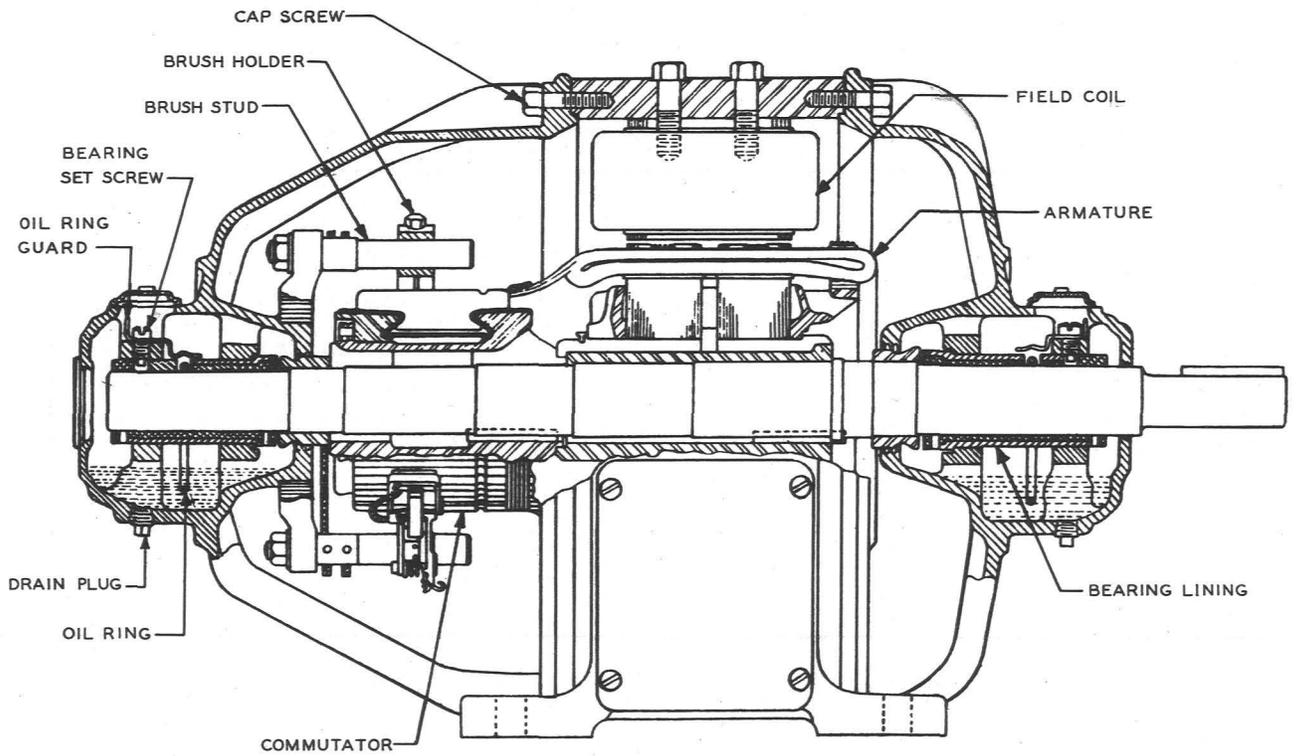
KS-5123 End-Shield-Type Generator - Cross Section
